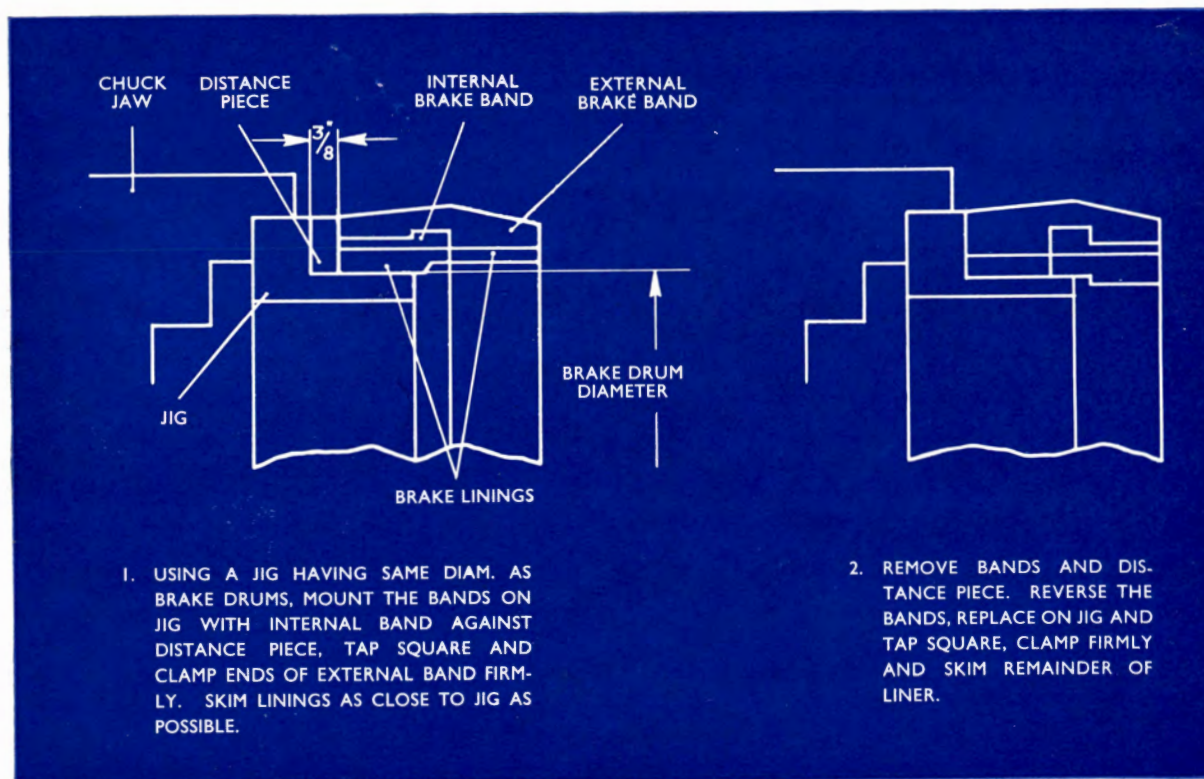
METHOD OF SKIMMING THE BRAKE LININGS
